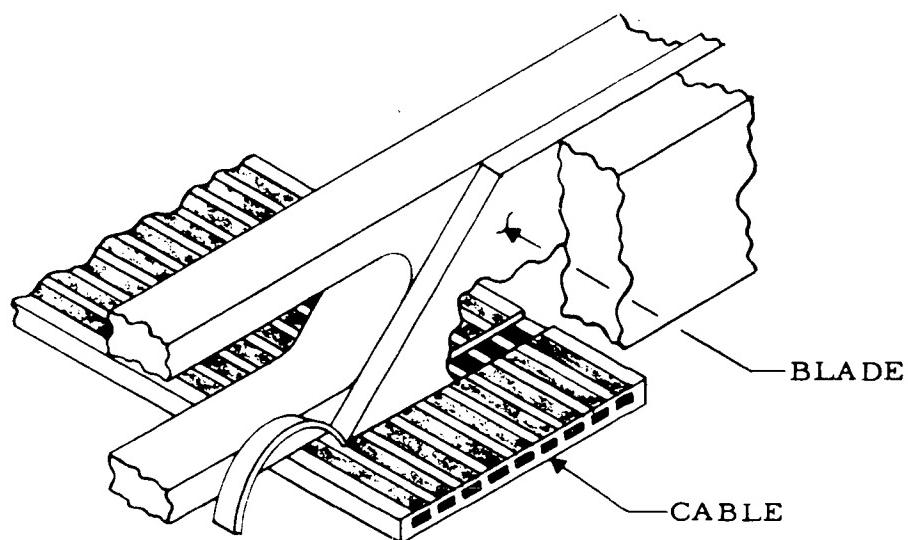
BLADE ACTION OF THE HOBEL STRIPPER
